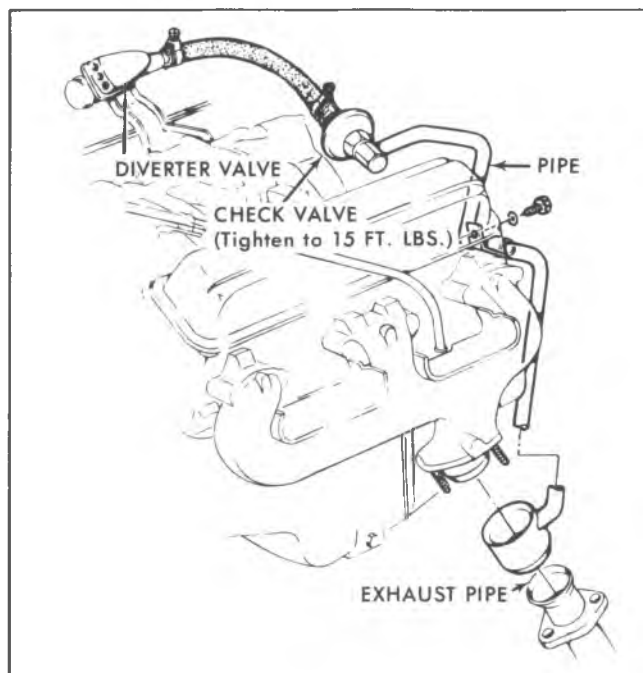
A.I.R. Pipe Installation - G10 and 350 V8 Cal.
